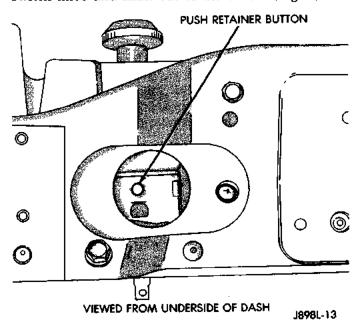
Headlamp Switch Knob and Shaft Remove/ Install - Typical
